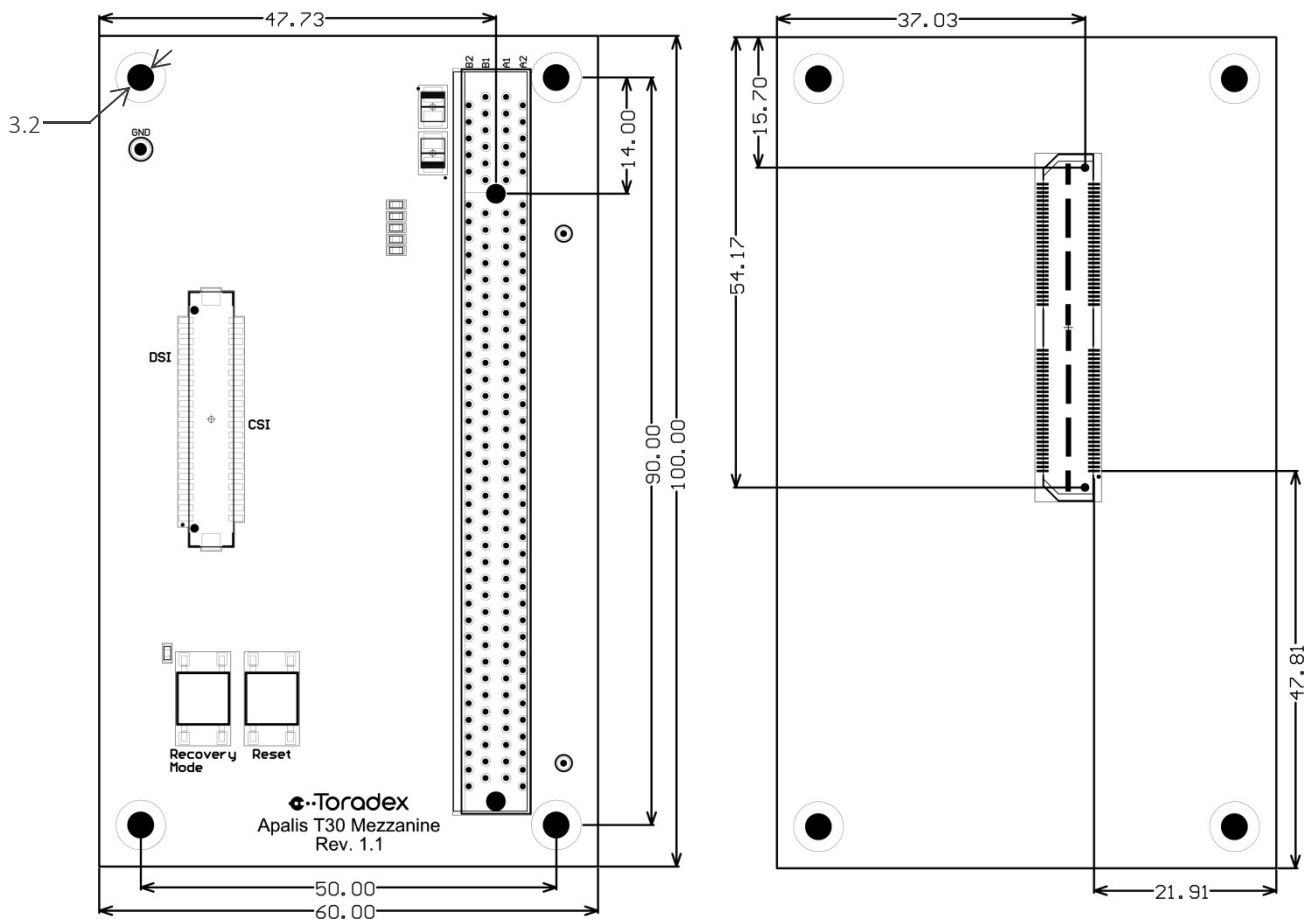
Apalis T30 Mezzanine Board dimensions in mm – Top and Bottom Side
